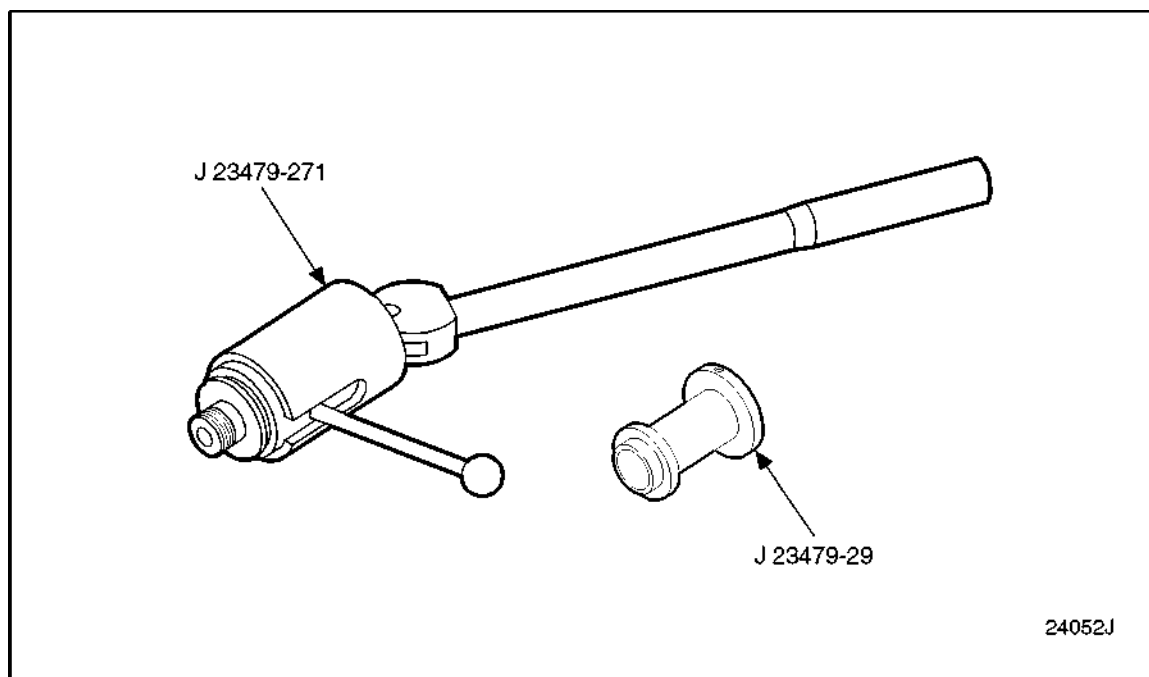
Valve Seat Insert Remover, J 23479-271
